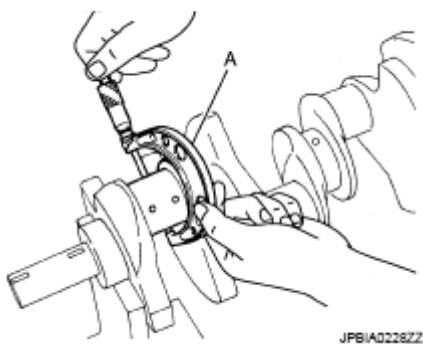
Measuring Connecting Rod Bearing Oil Clearance
